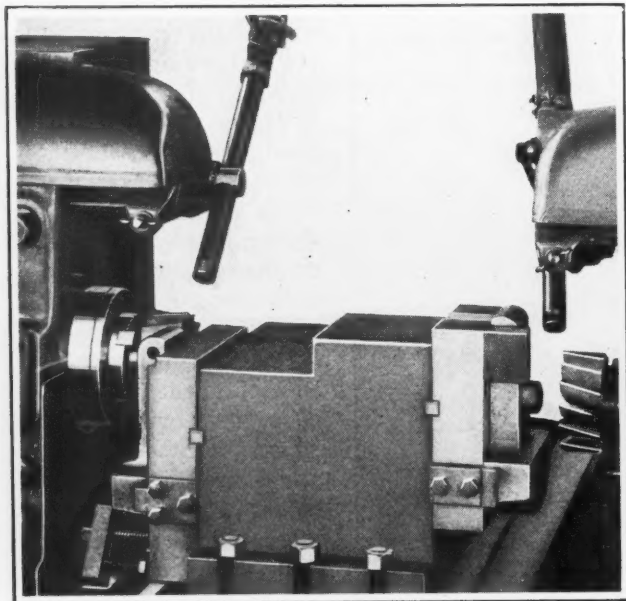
Milling the Front Faces of the Rear Crank Cheek in the Fixture Shown in Fig. 3
